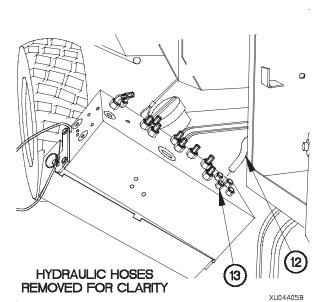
Hydraulic Manifold PN 65234 Rear View
